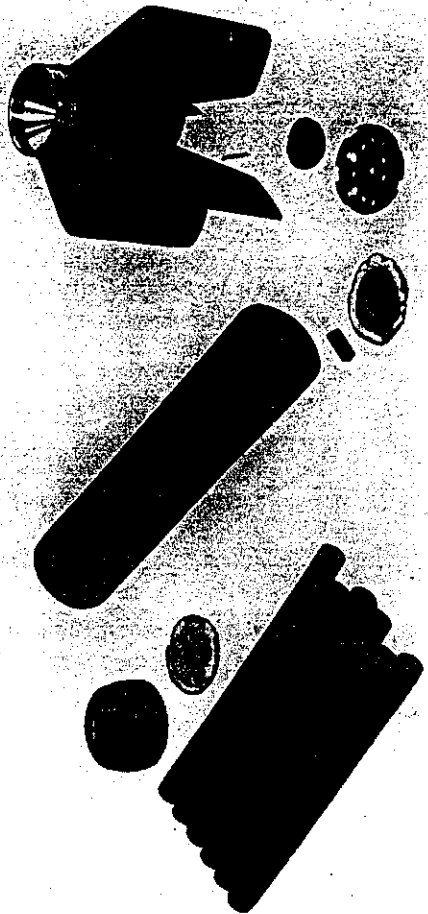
Disassembled rocket motor and tail assembly of 8-cm HE projectile.
